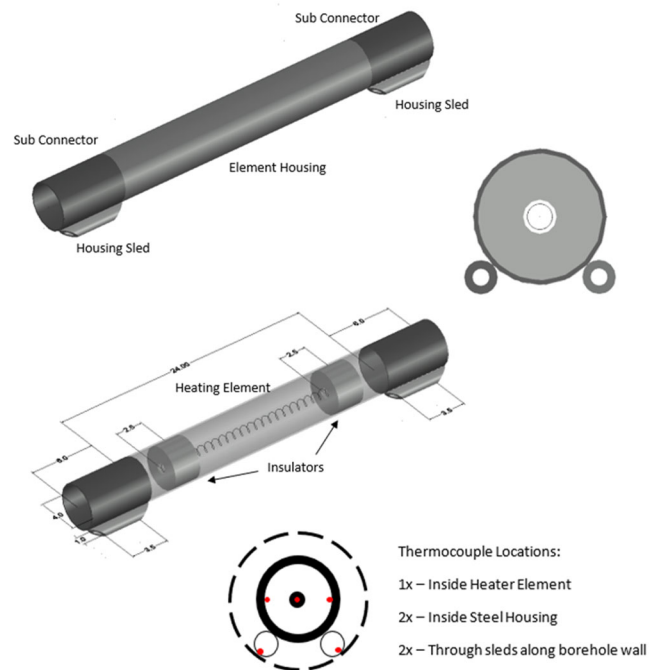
Prototype tool for the initial field tests. Dimensions in inches.
